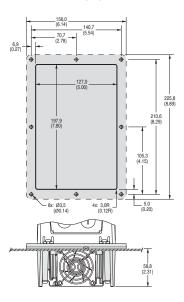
PowerFlex 70 Flange Mount Bottom View Dimensions
